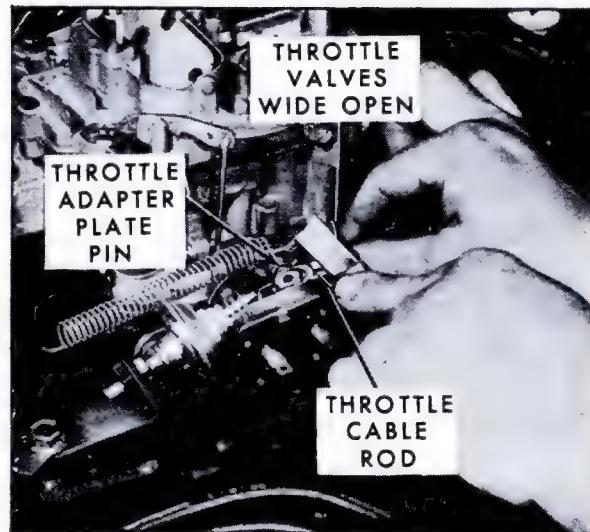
Throttle Rod Adjustment - 693 Only
